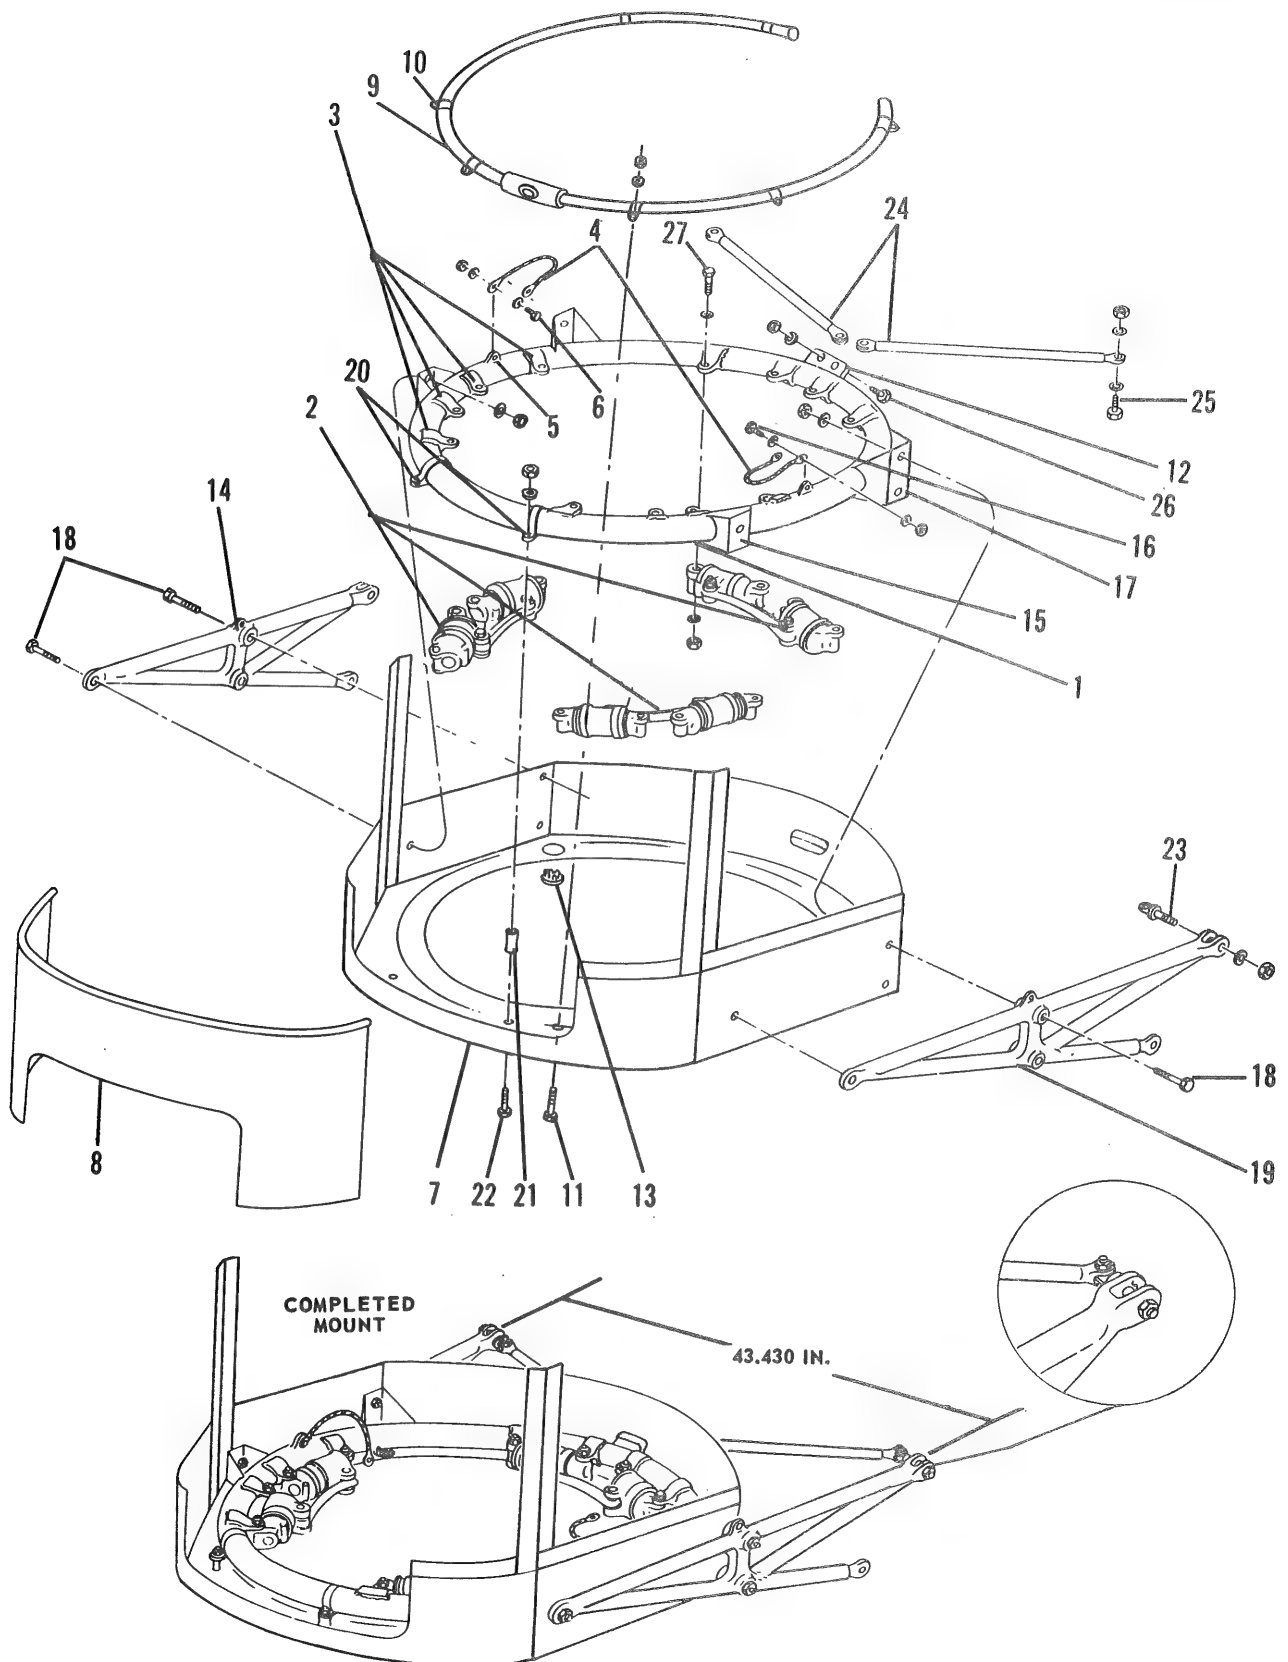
Buildup of Engine Mount (Sheet 2 of 2)
